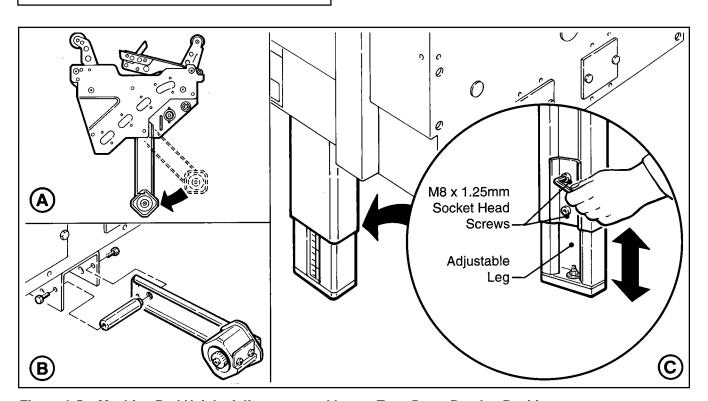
Machine Bed Height Adjustment and Lower Tape Drum Bracket Position
